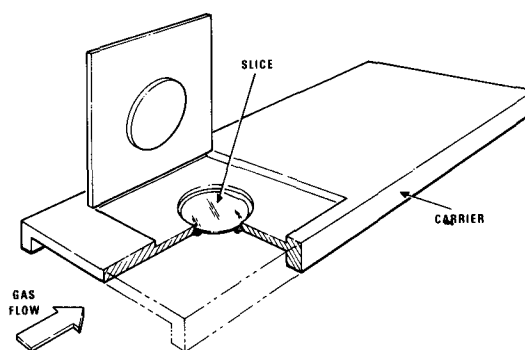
Cross sectional drawing of slice carrier showing gas channel.
